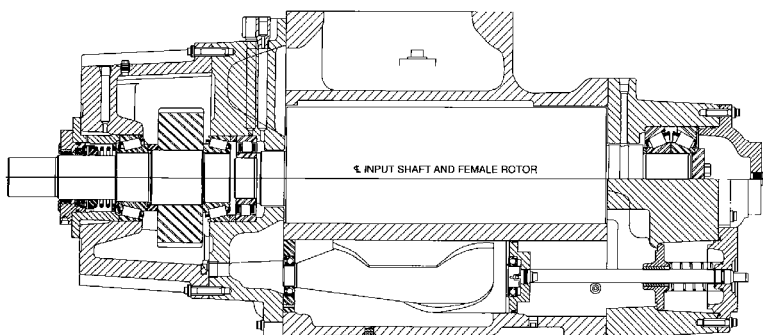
B Single Stage Oil Injected Screw Compressor with Integral Variable Displacement Control Valve
